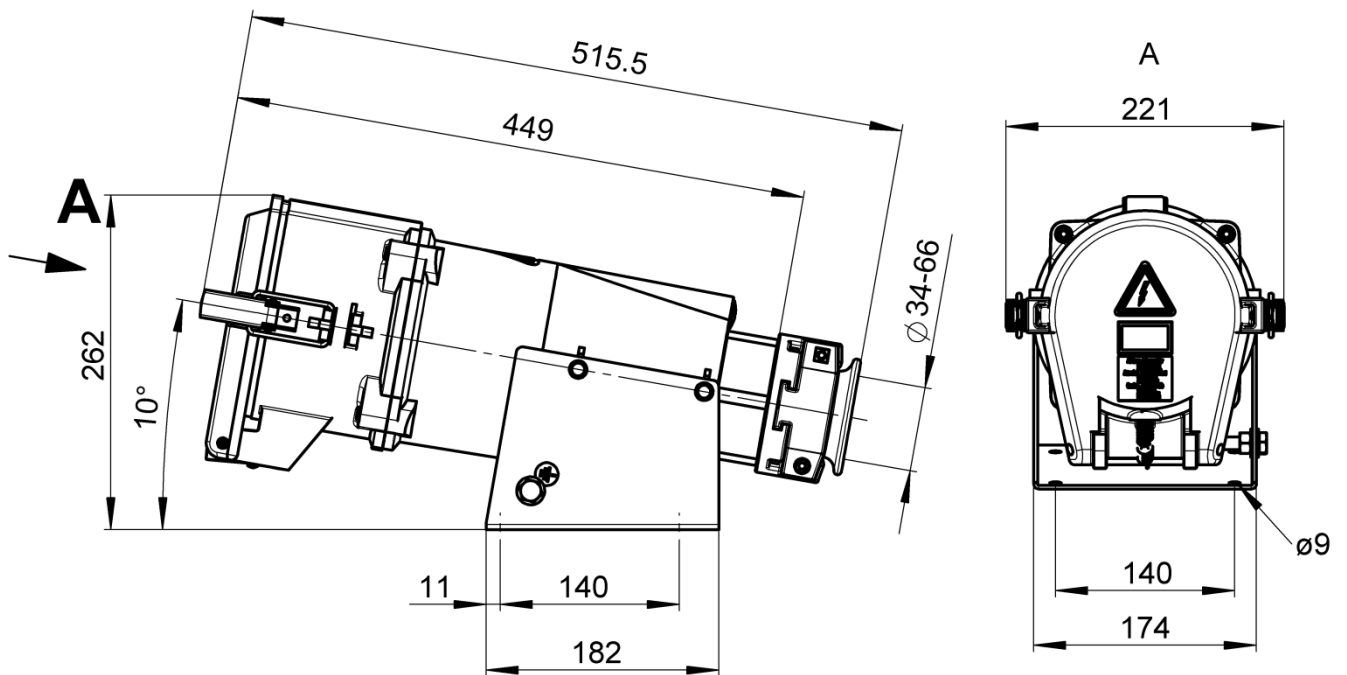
Dimensions Female Connector Wall FCW B-Line (250 A – 400 A) in mm
